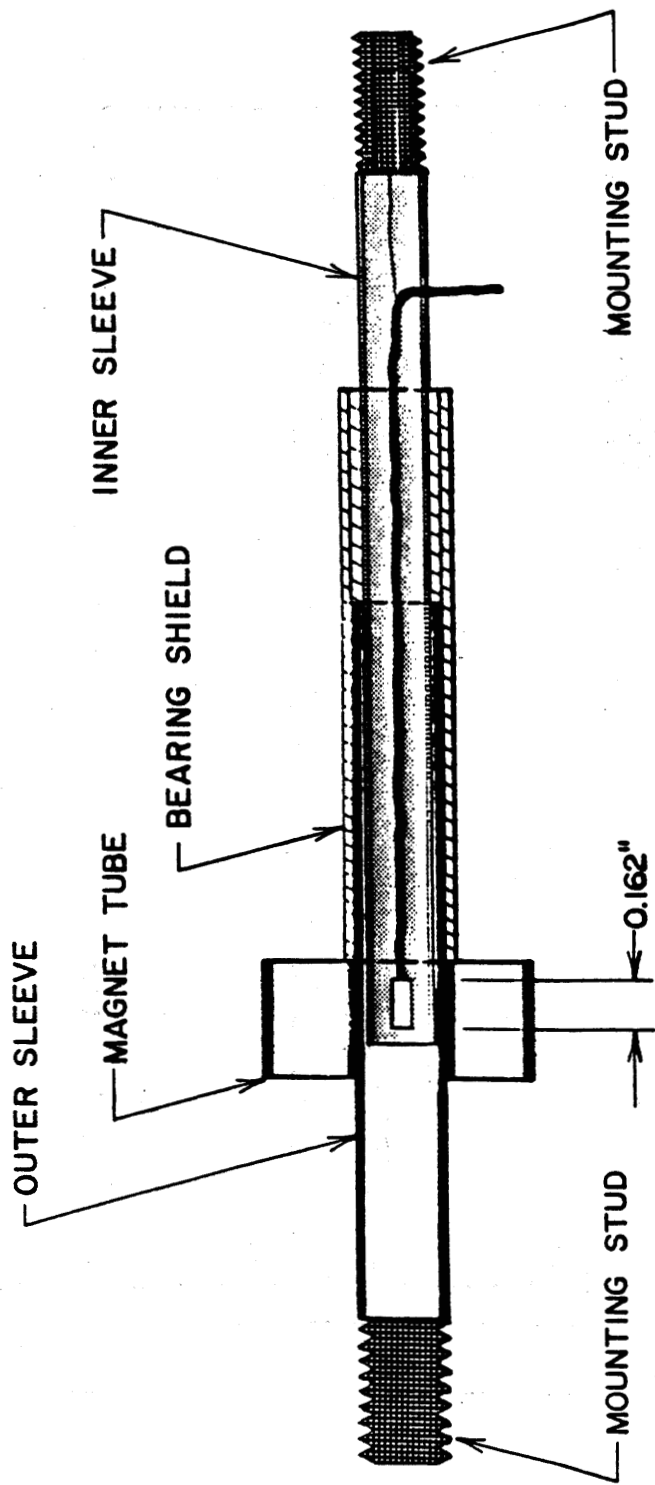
Completed sensor assembly drawings--SLD and soil transducer.
